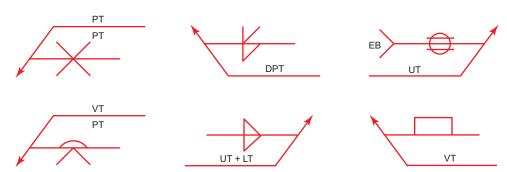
Combination weld and nondestructive testing symbols.
